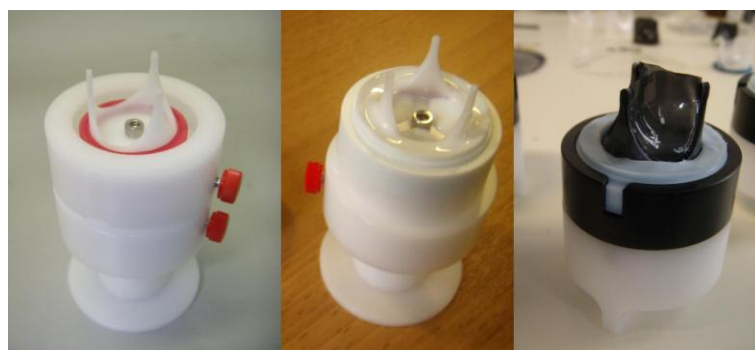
Silicone ring mould with a valve-less stent before (a) and after (b) application of silicone. (c) Valve mounted in piston cap.
